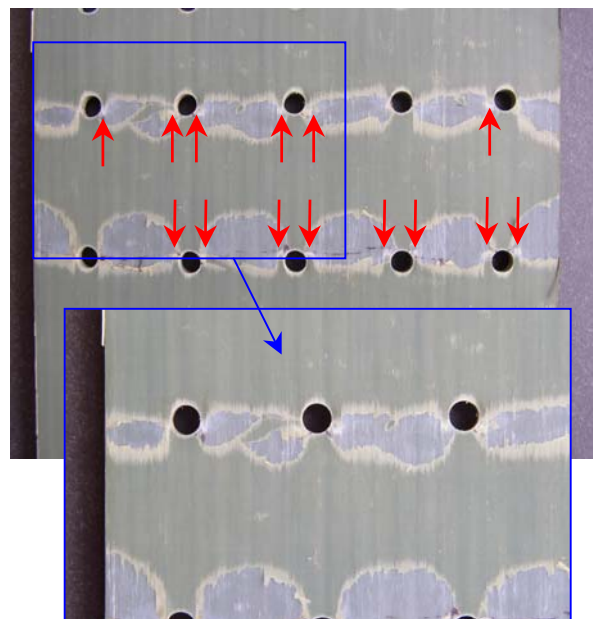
View on the mating aluminium layer of butt strap 2-B-18 after 200000 fatigue cycles and 115.5 kN static load, fatigue damages in rivet rows 3 and 4 visible
